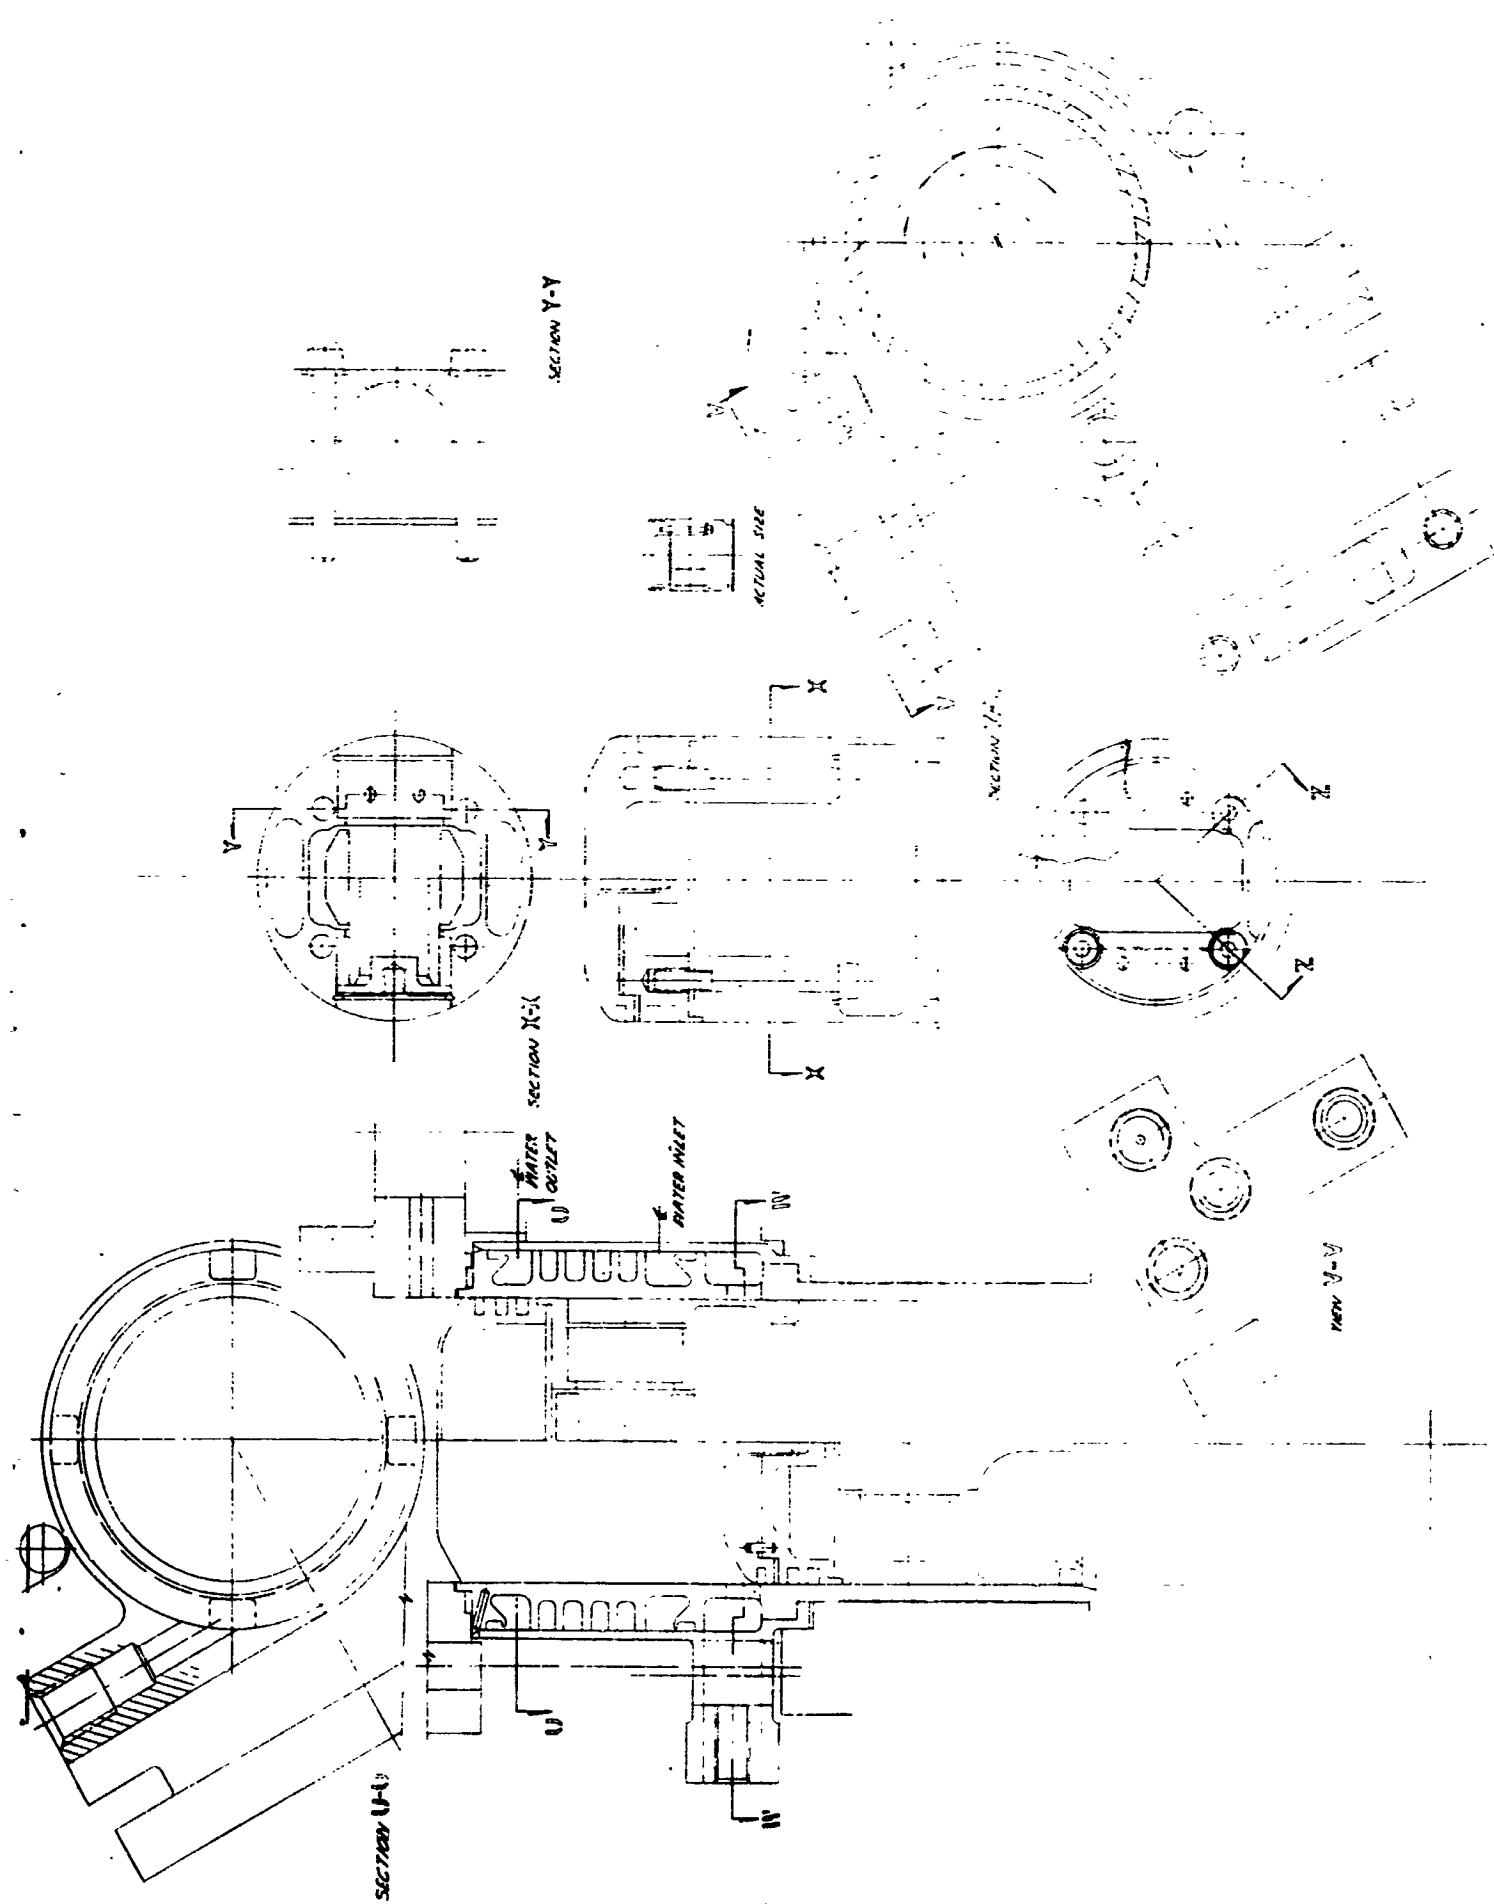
Layout Drawing of New Piston and Cylinder Design
